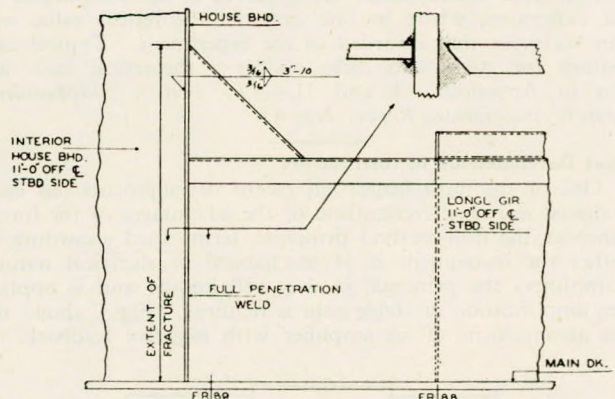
Hatch girder connexion to house side; starboard side looking inboard
